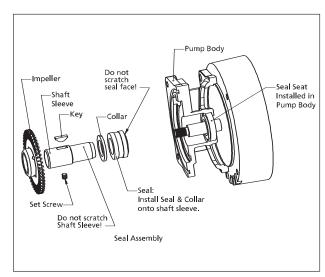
Seal, Collar, Sleeve and Impeller Installation
